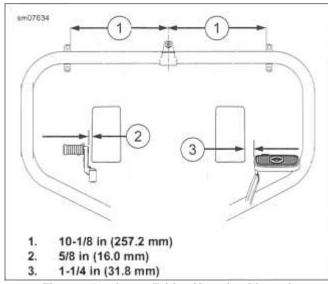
Lower Fairing Mounting Dimensions DISASSEMBLE AND ASSEMBLE: AIR-COOLED
